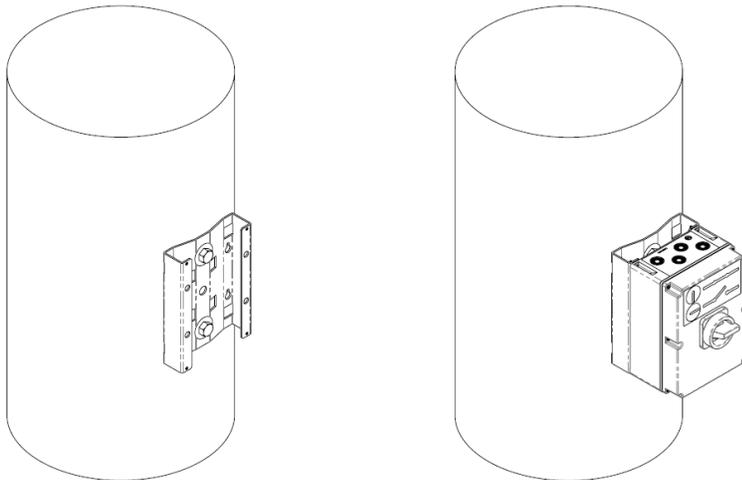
Mounting the DPX 48VDC load disconnect box to a wooden pole
